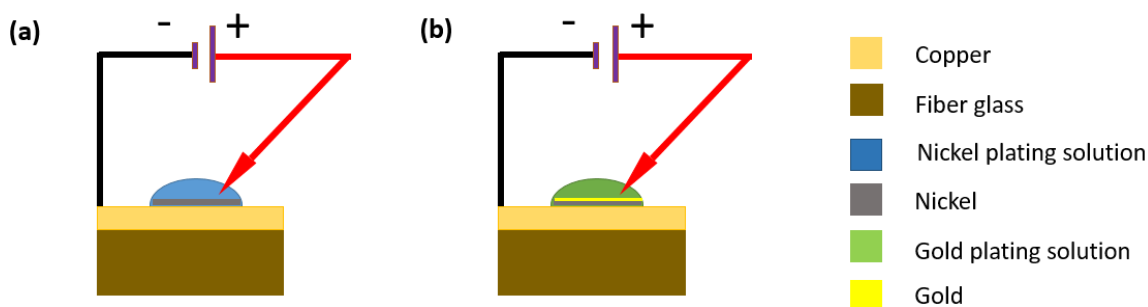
Hard gold plating for PCB diagram. (a) Nickel layer plating (b) Gold plating on nickel
